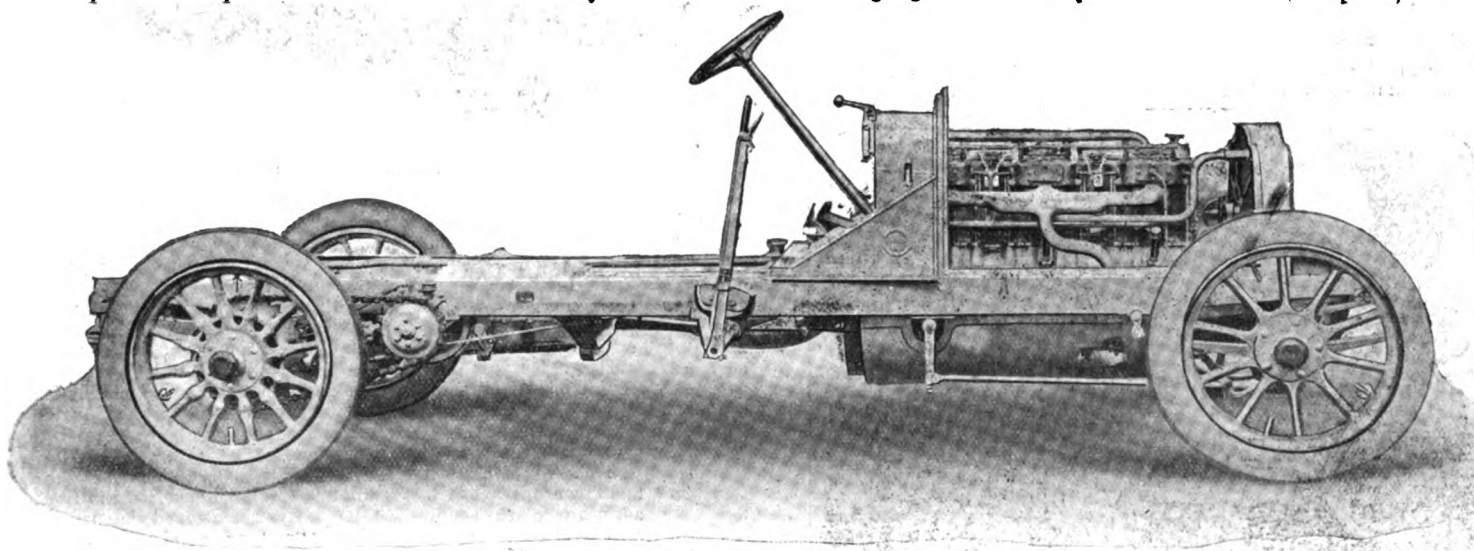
Chassis of Mors Six-Cylinder Car.
